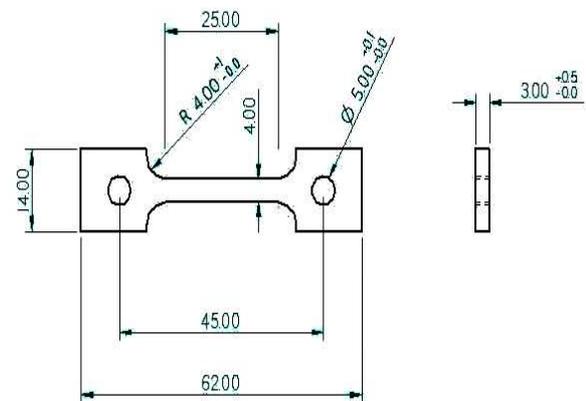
The dimensions of the samples (in millimeters) used for tensile testing
